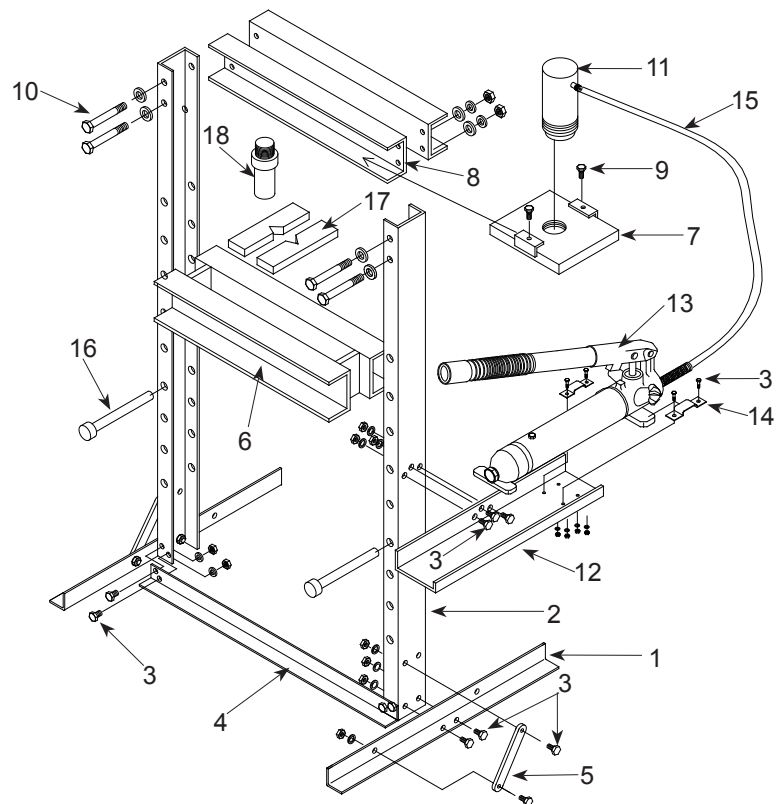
Assembly Illustration for Model 1MZJ4 and MMZJ8
